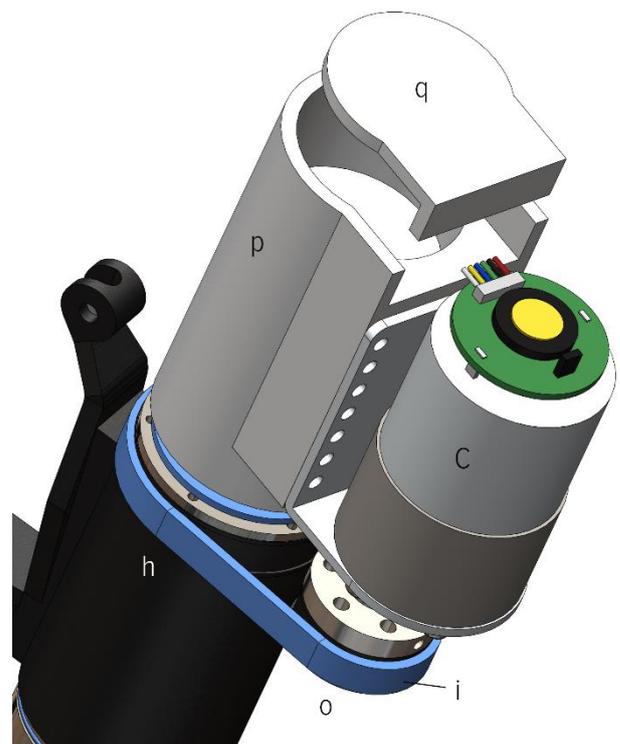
The motor (C) with its holder (p) and the cover (q) lifted. A gearwheel (o) is rotated by the motor. This rotation is transferred to another gearwheel (h) using a belt (i).
